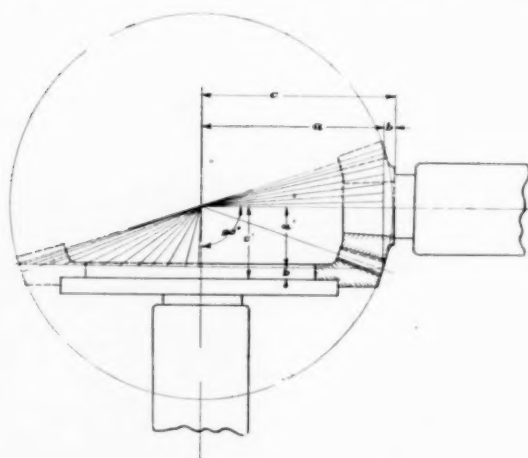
FIXED POSITION OF TESTING-MACHINE HEADS
